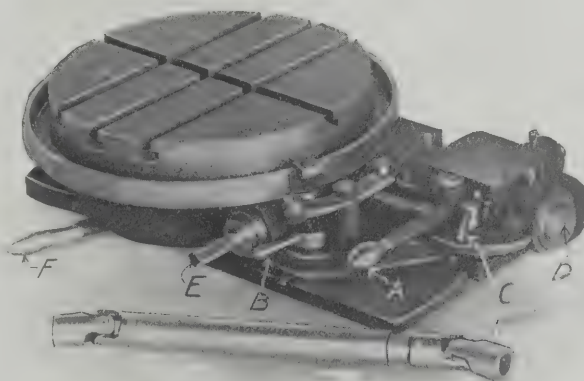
Rotary Milling Attachment Removed from Table, in order to show Details
